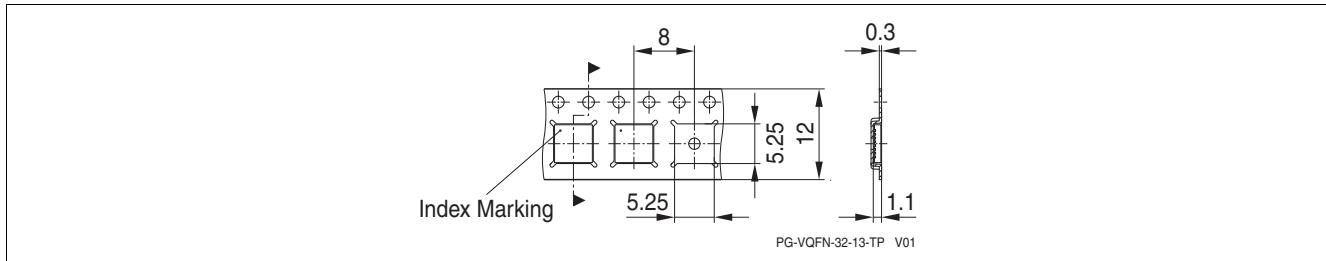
Tape & Reel Dimensions PG-VQFN-32-13
